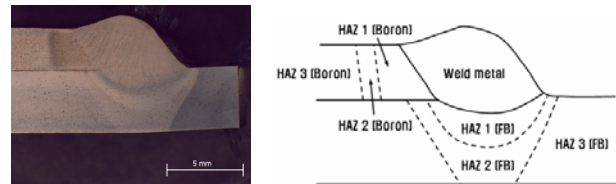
Real and schematic cross-section view of welded specimen from Group 4 (0.48 kJ/mm).
